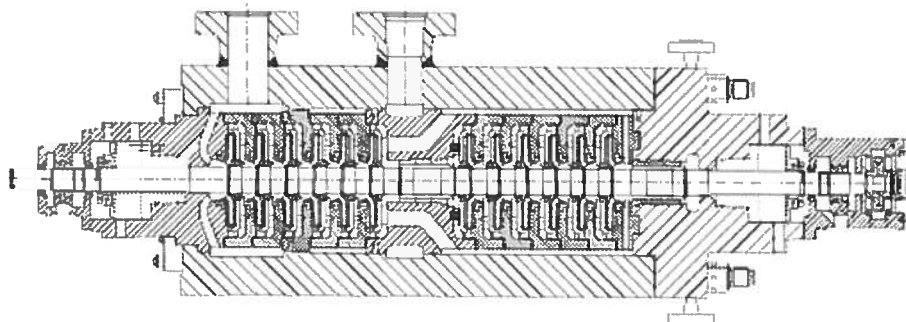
Type BB5 between-bearings radial split double case multistage pump with back-to-back diffuser construction
